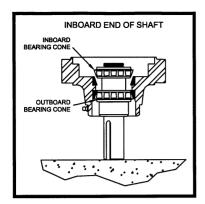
Placing Inboard Bearing Cone onto Shaft
